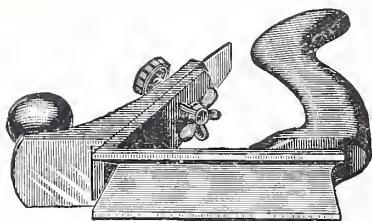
ADJUSTABLE CHAMFER PLANE.
